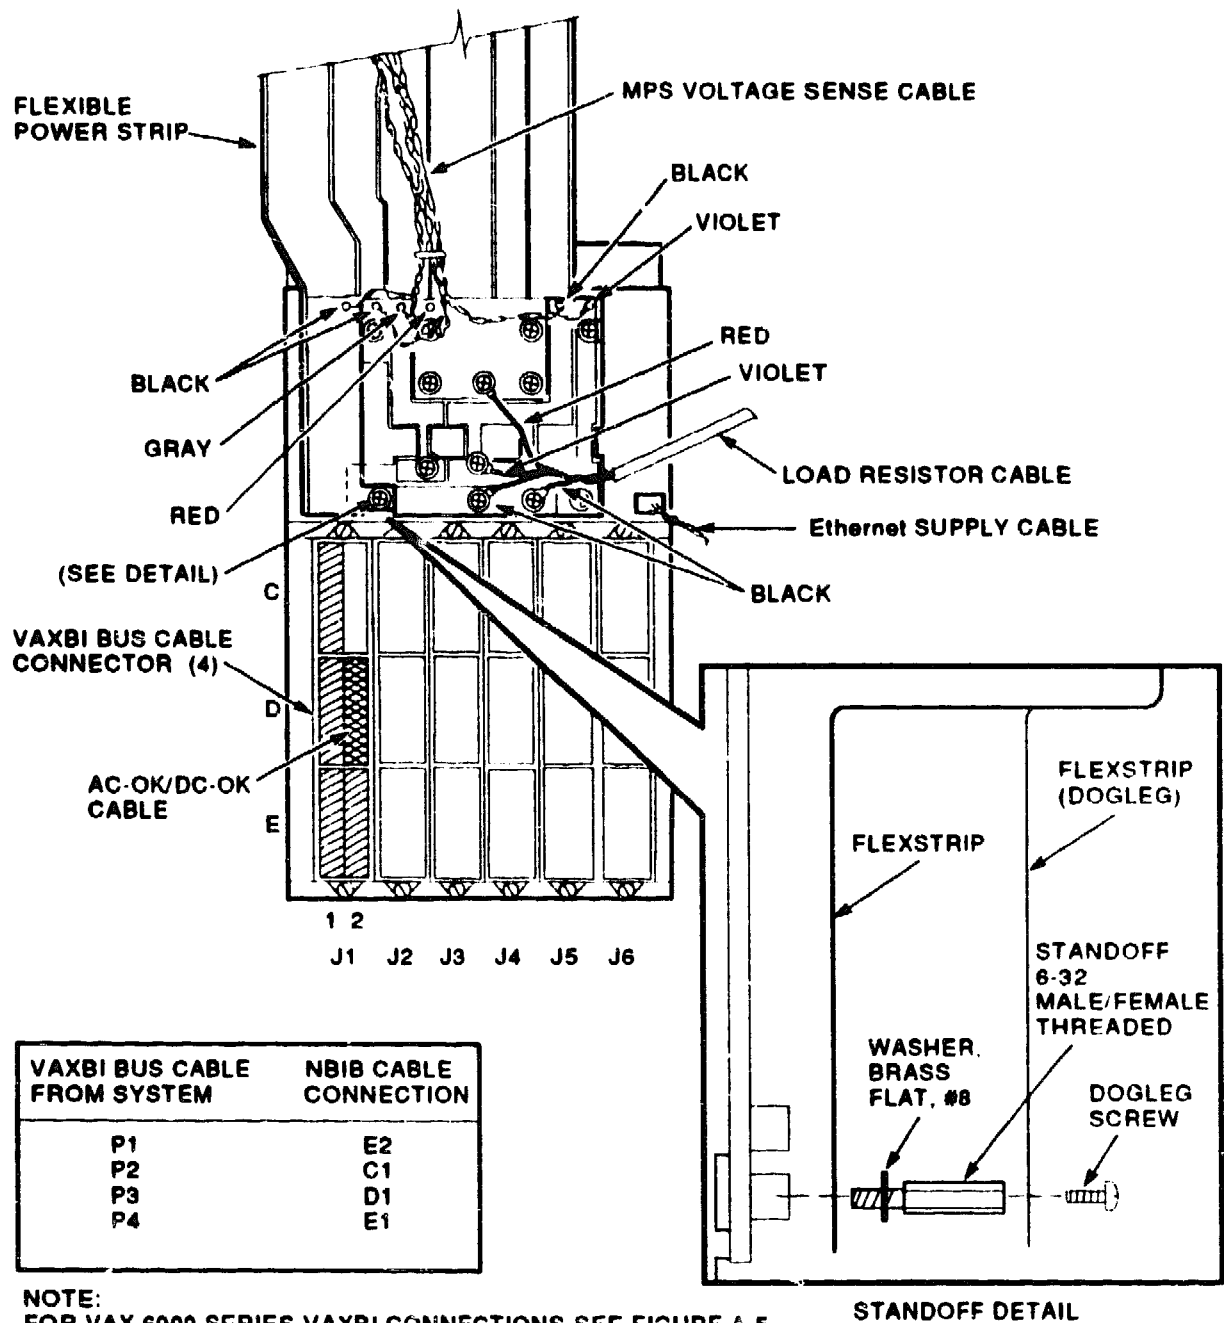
shows the typical VAXBI card cage connections for the flexible power strip (P/N 17-01791-01) and cables.
